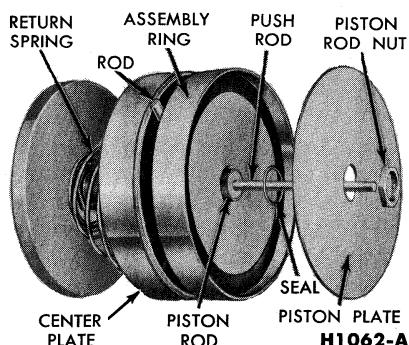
Rear Vacuum Piston, Return Spring, and Outer Plate Assembly
